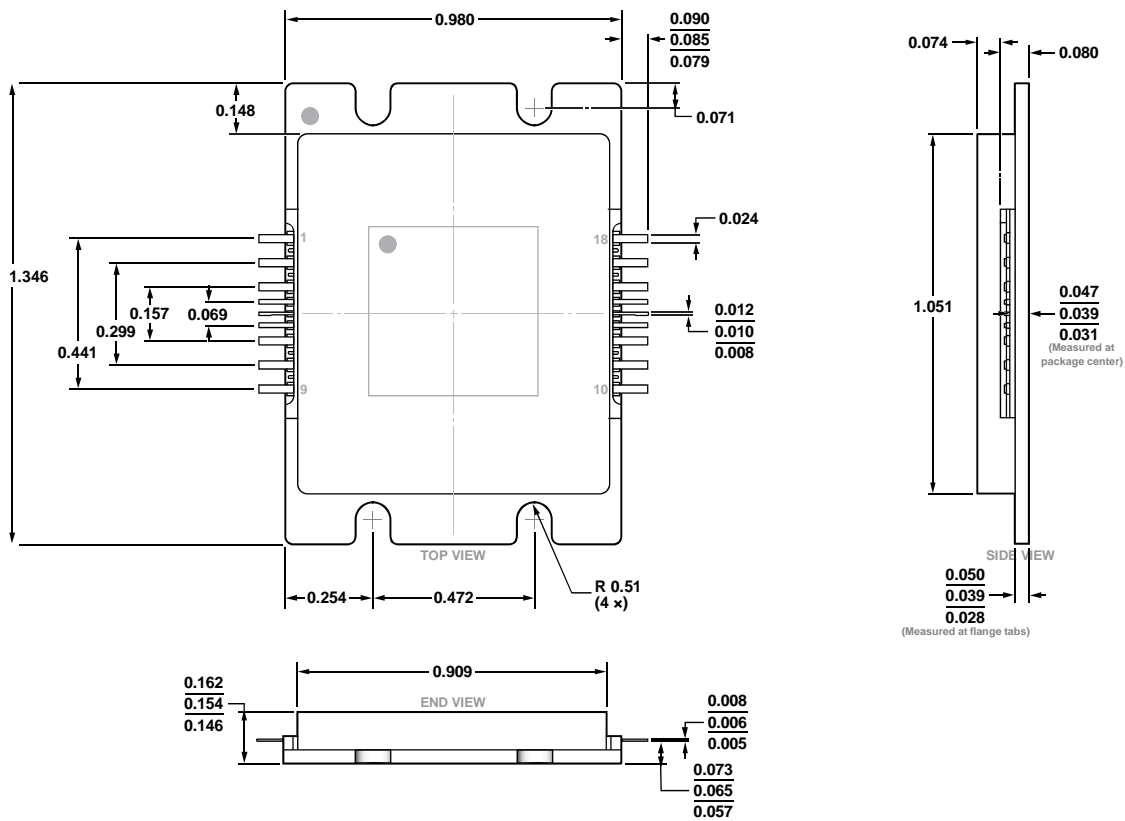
18-Lead Multichip Module Hermetic Ceramic/Metal Package [CM]
